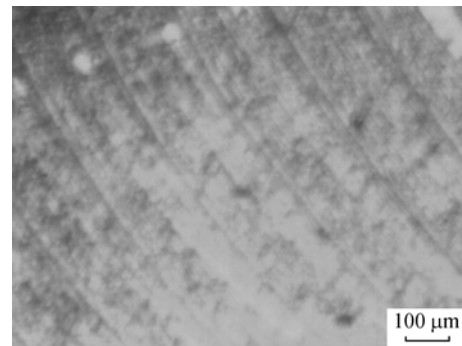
Milled surface of the aluminum alloy-1wt% silicon carbide composite work piece.
